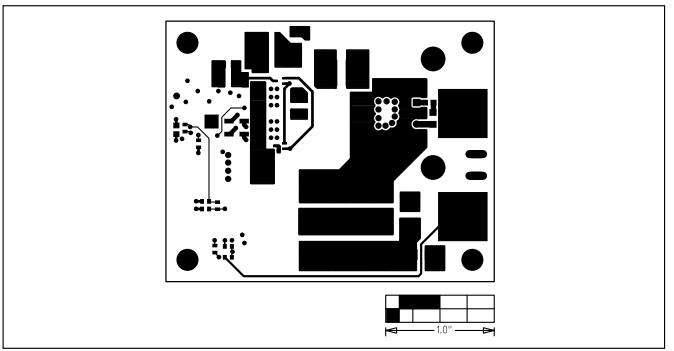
MAX5069A EV Kit PC Board Layout—Solder Side
